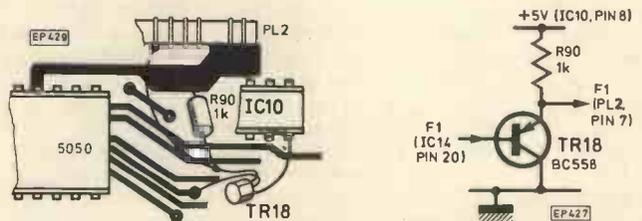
Buffer circuit modification for the decoder board. It may be necessary to increase the length of the leads of TR18 using tinned copper wire. Resistor R90 should be soldered to plug PL2 with the daughter board removed
